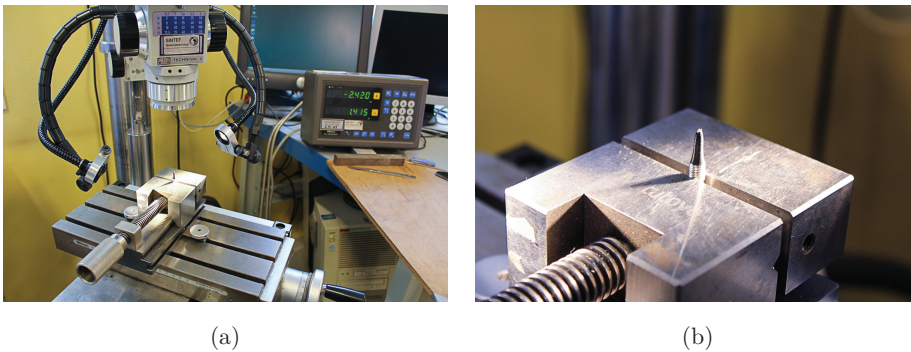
(a) Microscope equipment for measuring post-fracture area of test specimens and (b) test specimen mounted in microscope setup
